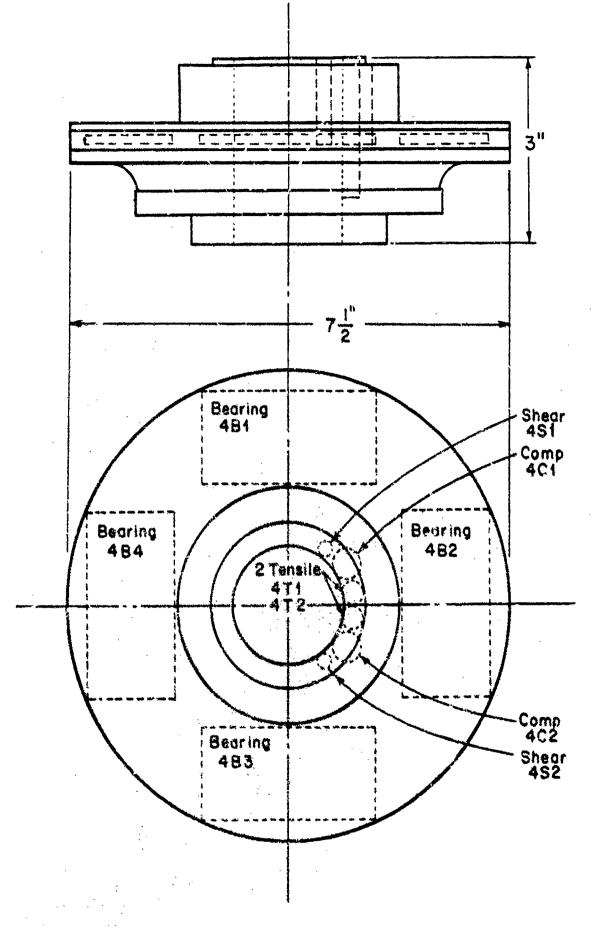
Location of test specimens for 15-5PH (H935) impeller #1 casting.
